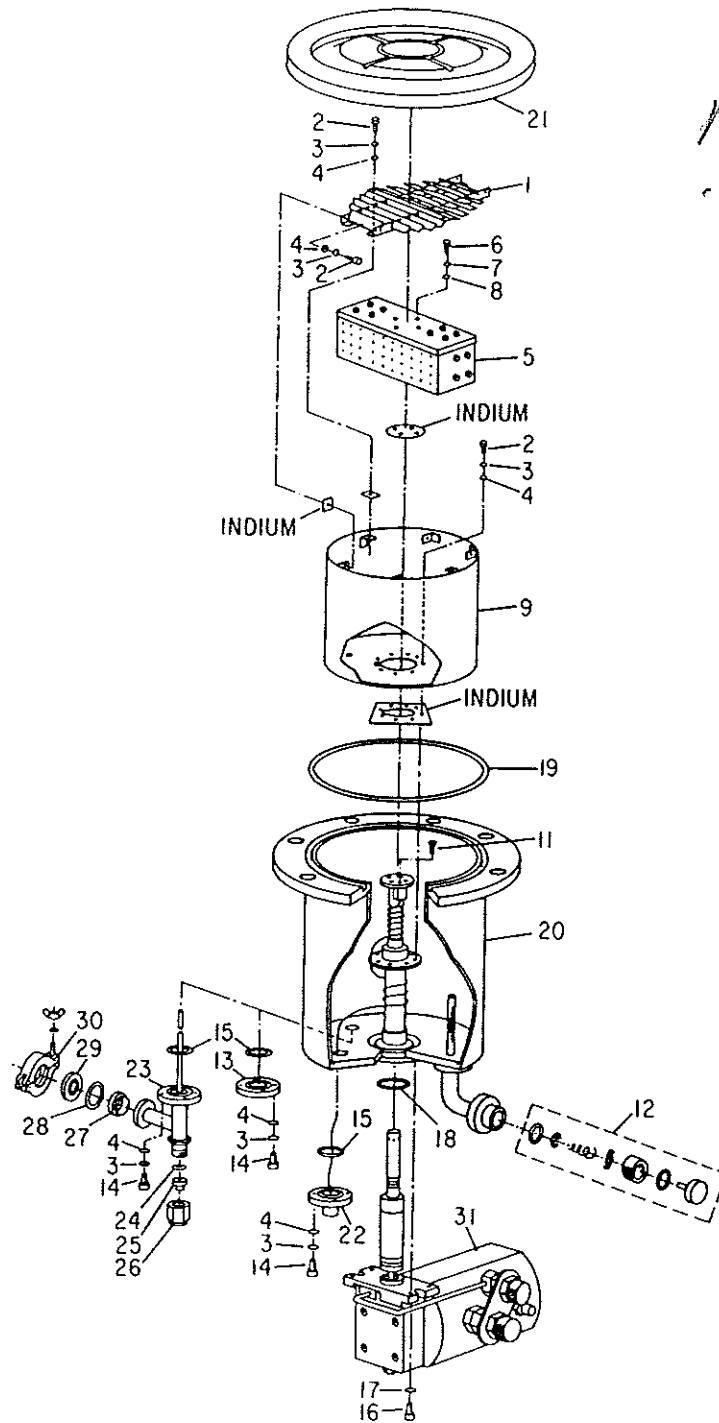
Exploded view of Cryo-Torr 7 Cryopump
